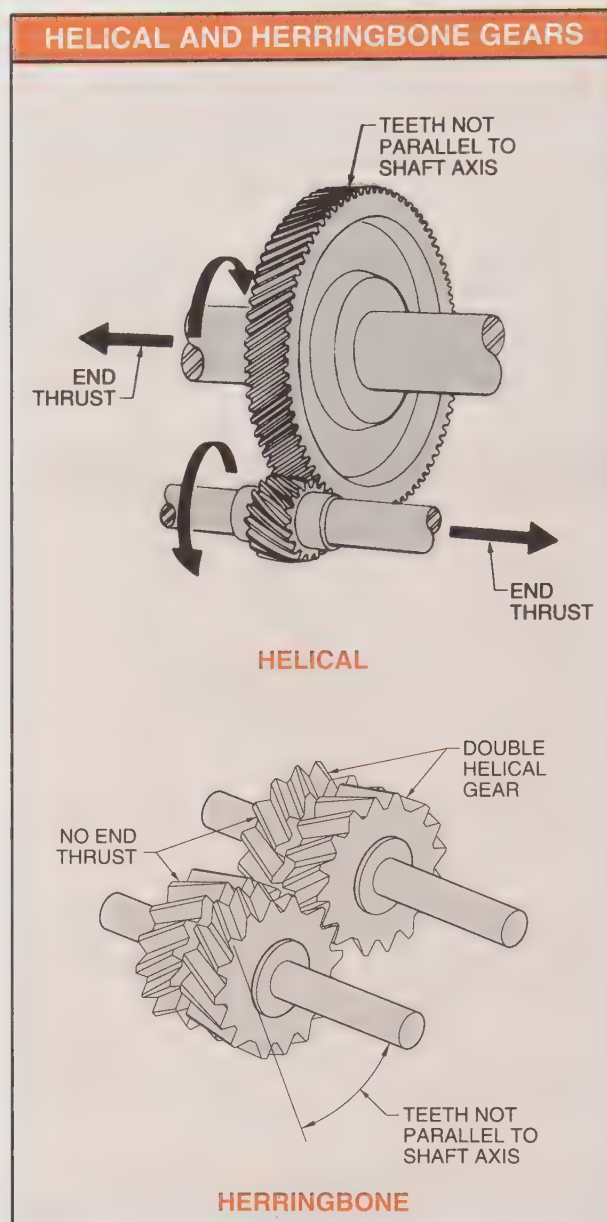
Helical gears have angled teeth which produce end thrust under load.
